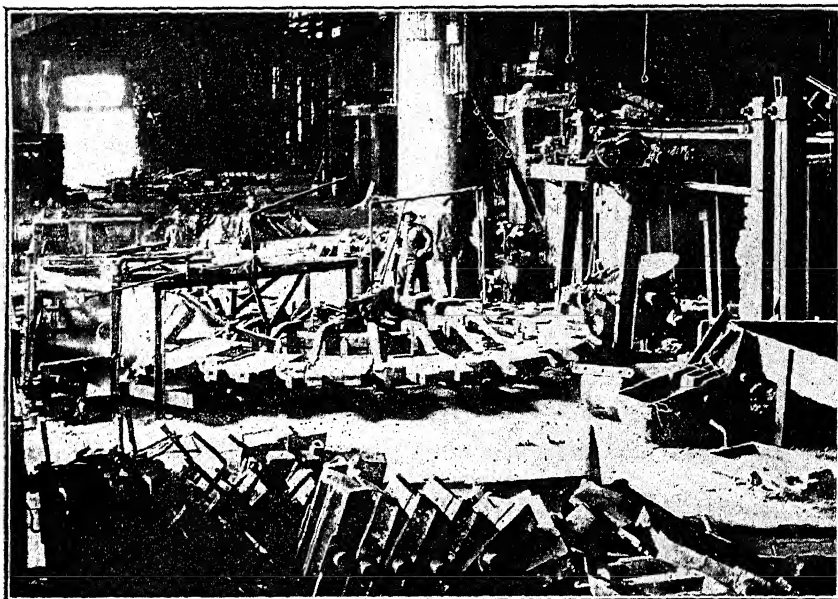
EARLY ARRANGEMENT OF CASTING MACHINE.
